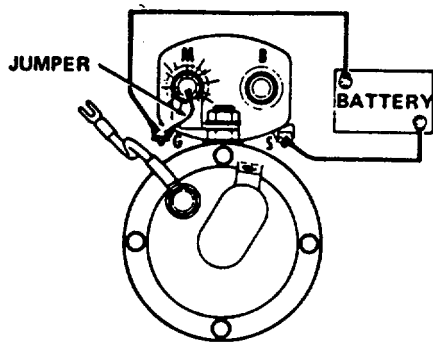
Circuit for Checking Pinion Clearance (Code A)
